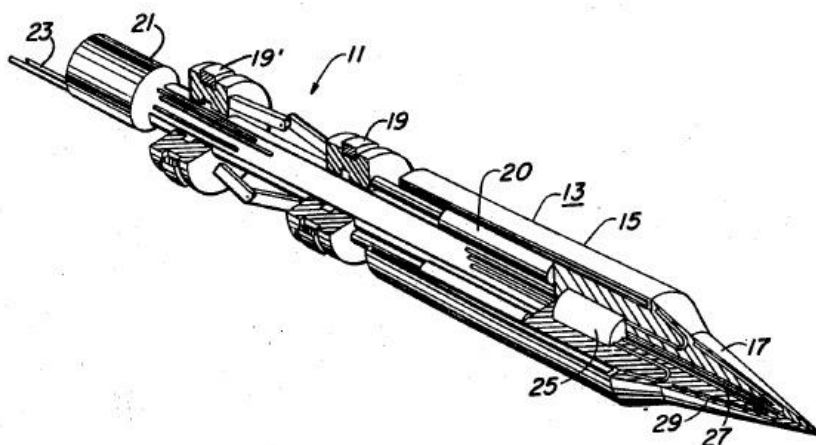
A drawing showing the main structure parts of the patented machine¹⁴⁵
